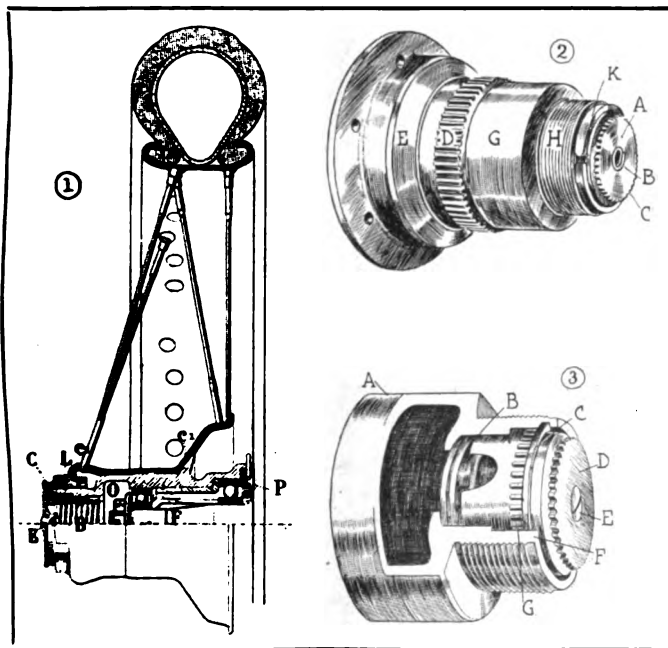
(1) R.A.F. demountable wire wheel on a front-wheel spindle—(2) auxiliary hub upon which pressed-steel wheel hub is mounted—(3) the barrel or plug serving, together with the screw cap, to secure the wheel
